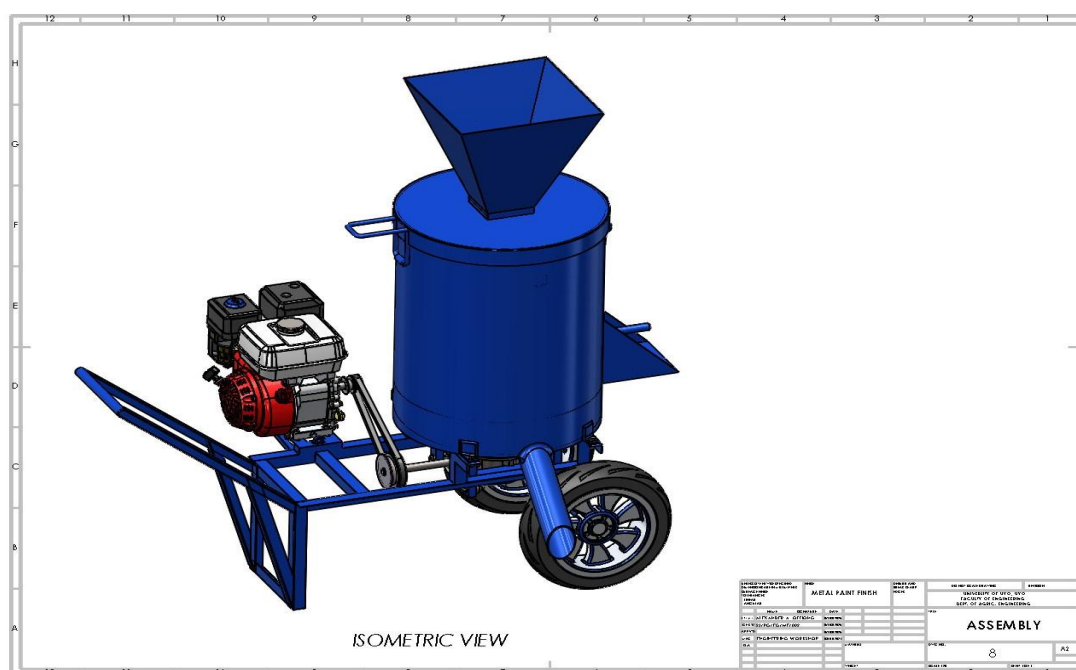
Isometric coloured drawing of the vertical palm fruit digestion machine by Reseracher (2025)
